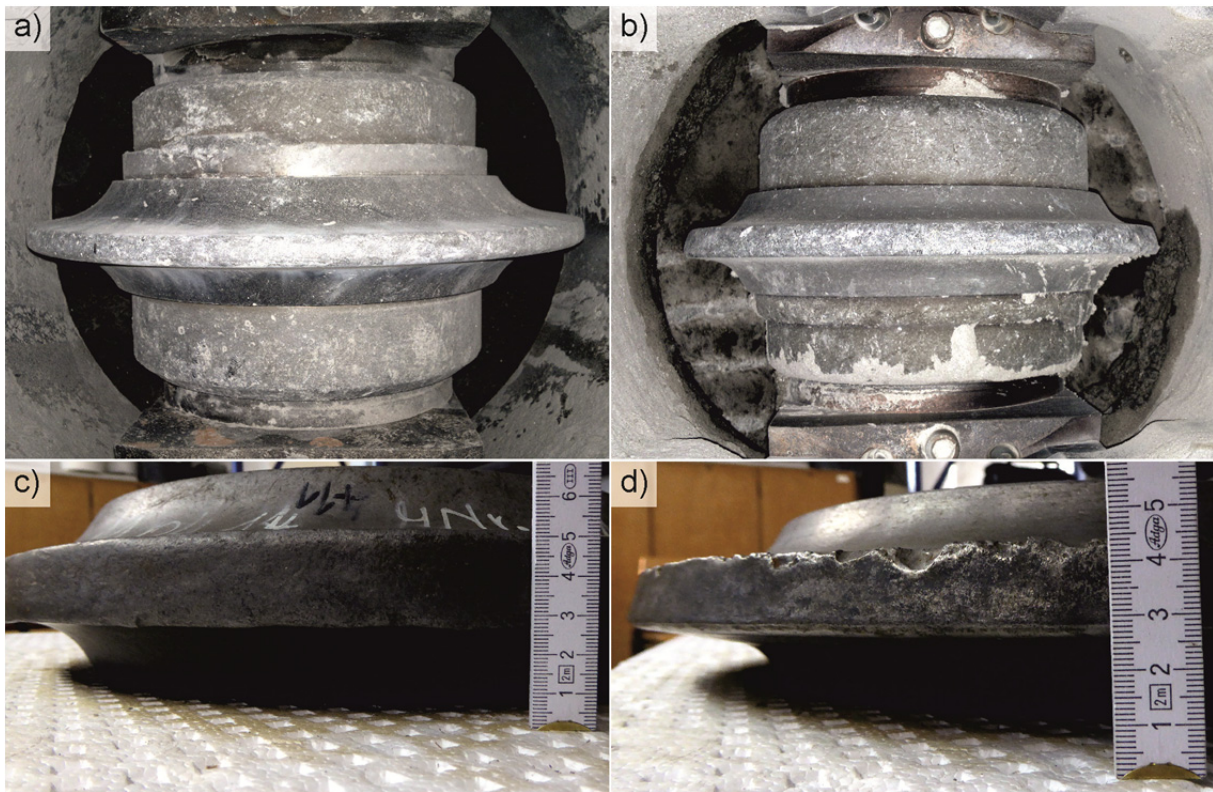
TBM disc cutters showing types of abrasive wear and asymmetrical wear.
